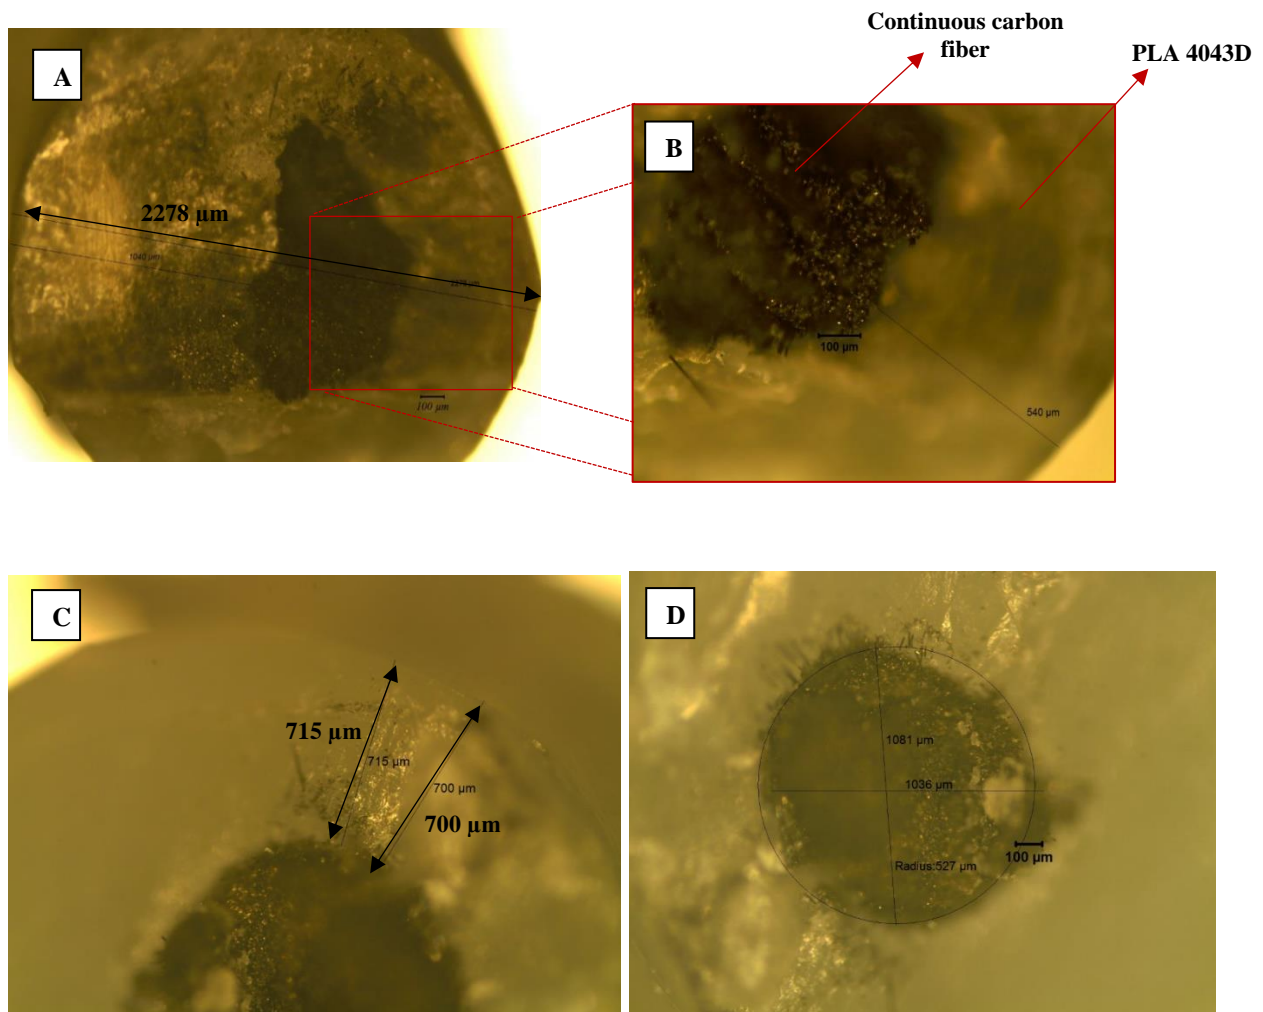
Cross-sectional view of the coaxially extruded materials. (A) and (B) presents coaxially extruded carbon fiber (core) and PLA4043D (shell), with 5X magnification. (C) and (D) presents coaxially extruded carbon fiber (core) and PCL (shell), with 5X magnification.
